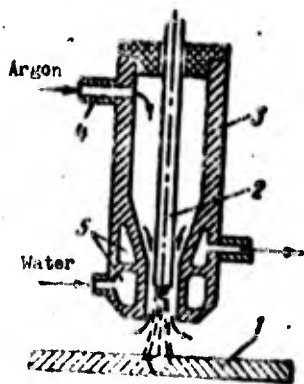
Diagram of plasma welding: 1 - welded parts; 2 - electrodes; 3 - tip; 4 - pipe connection; 5 - channels.
